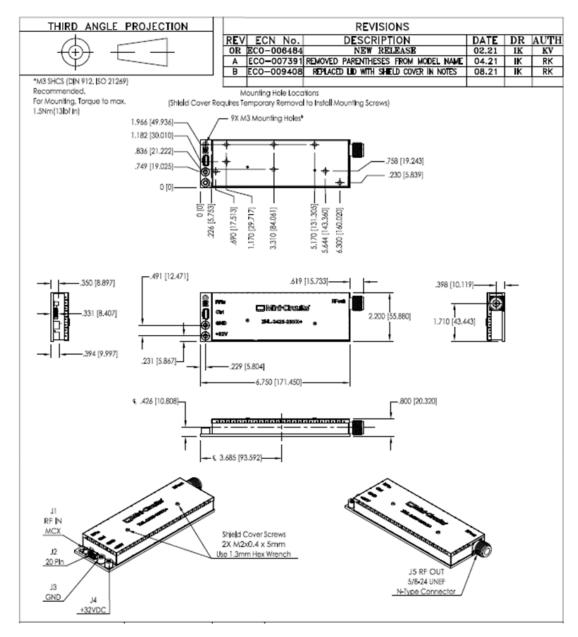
Outling drawing showing the locations of the 9 mounting holes on the ZHL-2425-250X+ (.124in. Dia., 7 under the cover, sized for M3 socket head screw)
